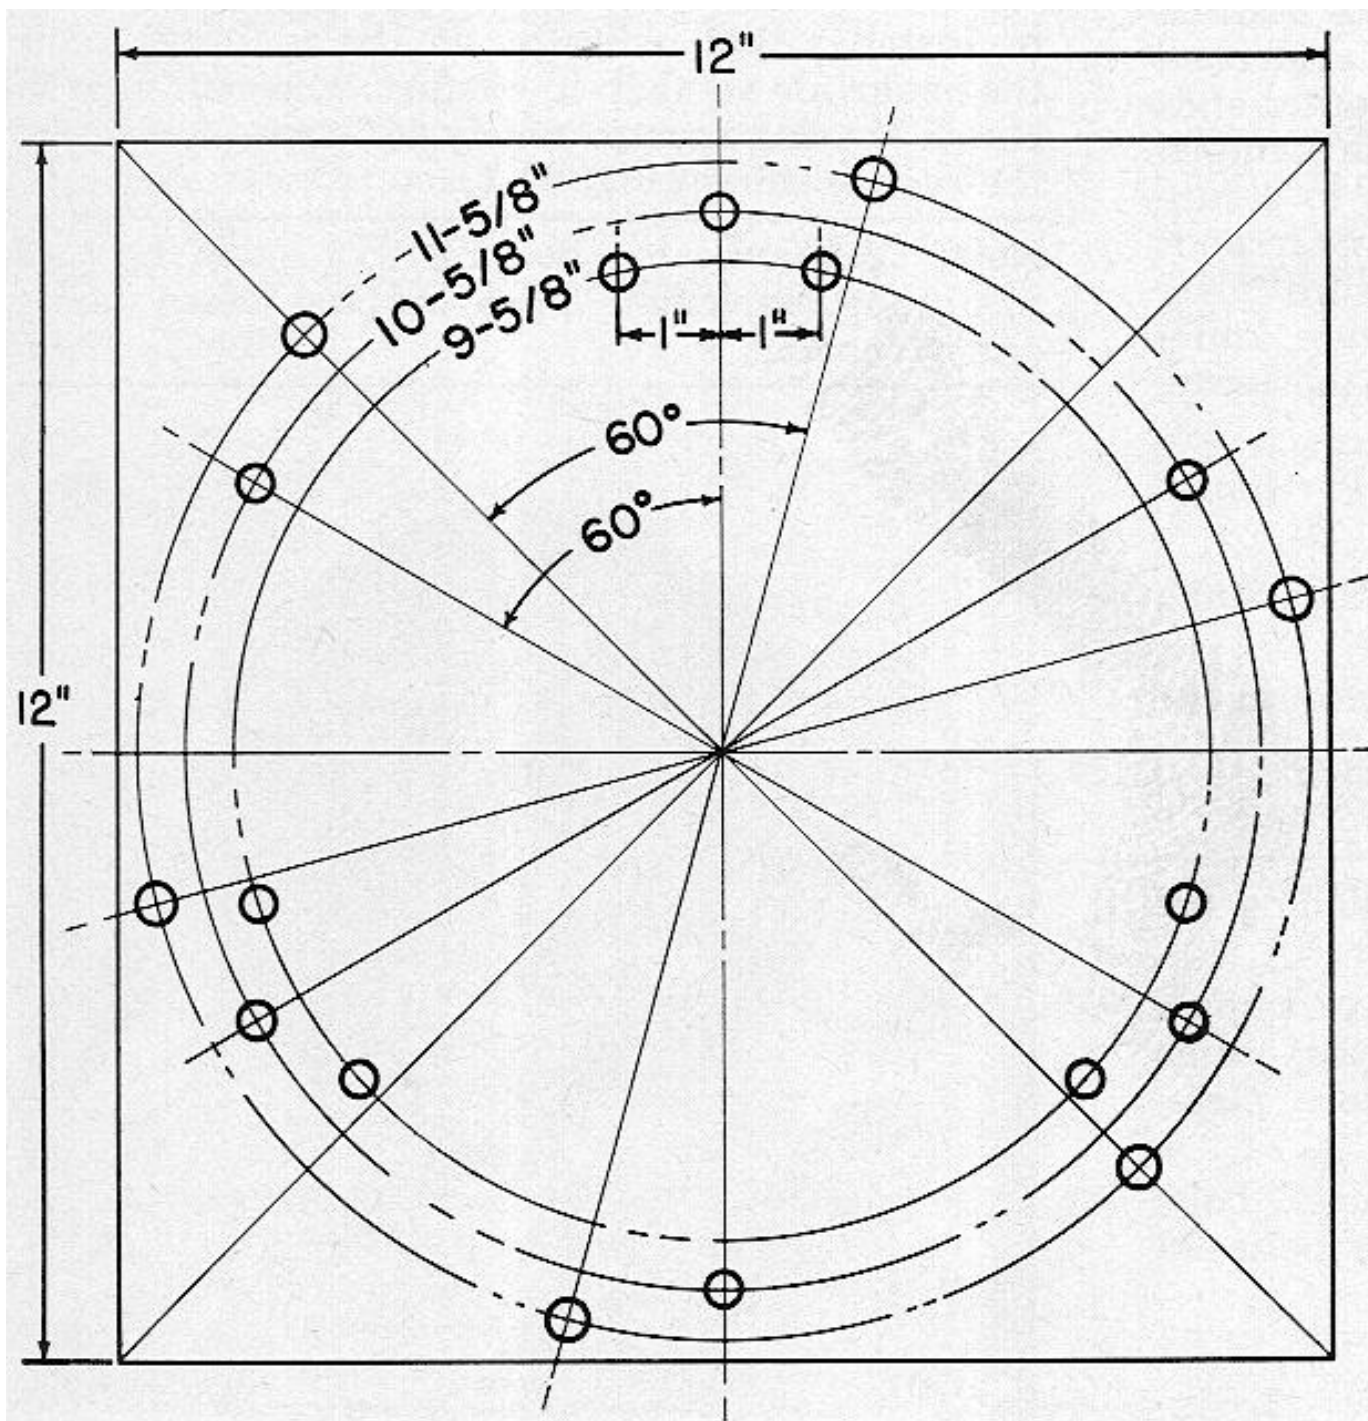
CLUTCH ADJUSTING FIXTURE
